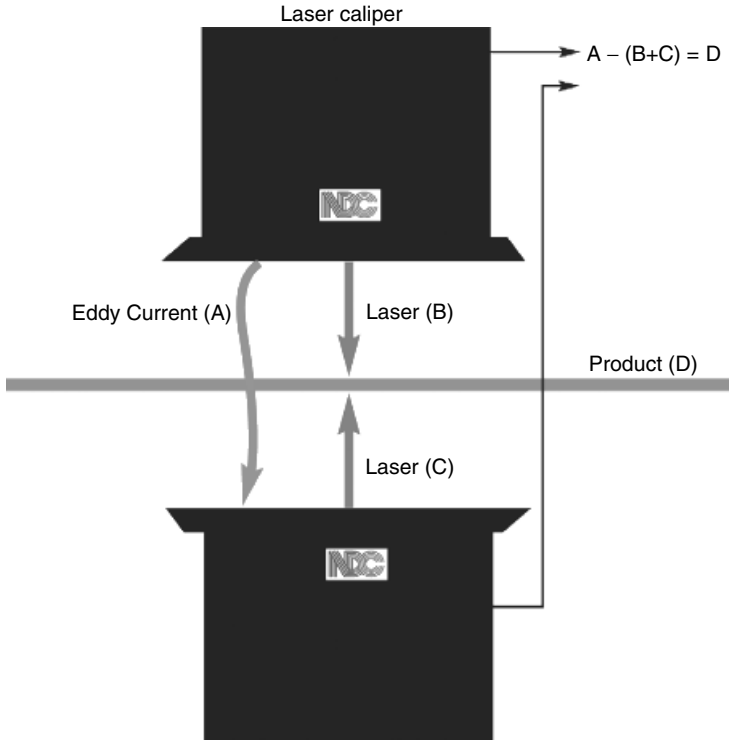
Laser caliper gauge. (Courtesy of NDC, Irwindale, CA.)
